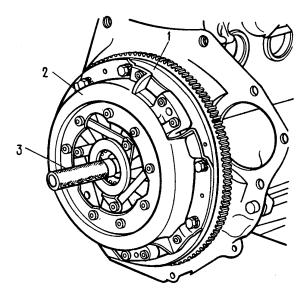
Aligning Driven Disc with Mandrel A.70081:
